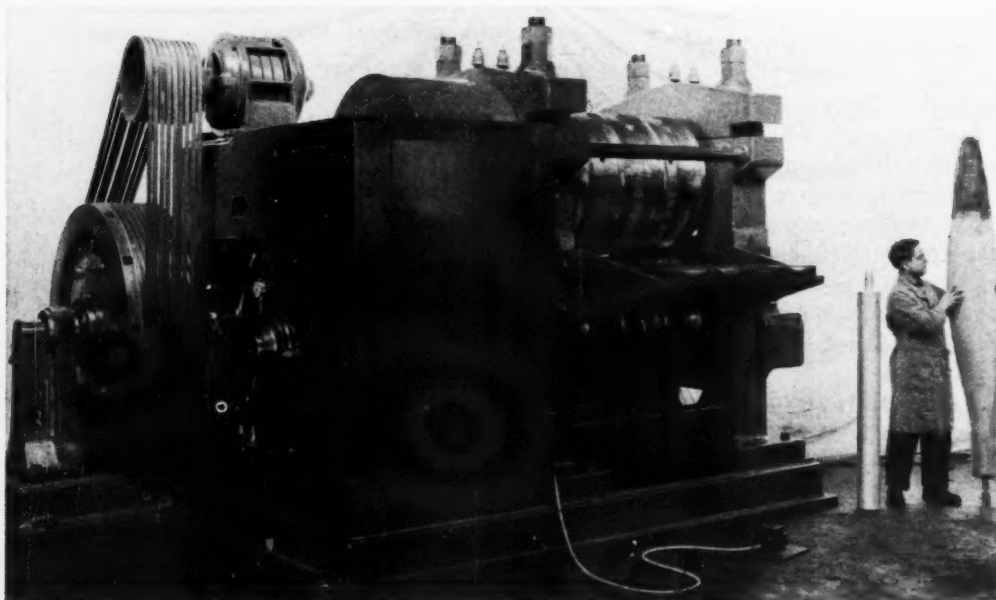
These forging rolls produce aluminum propeller blade blanks from cylindrical stock
